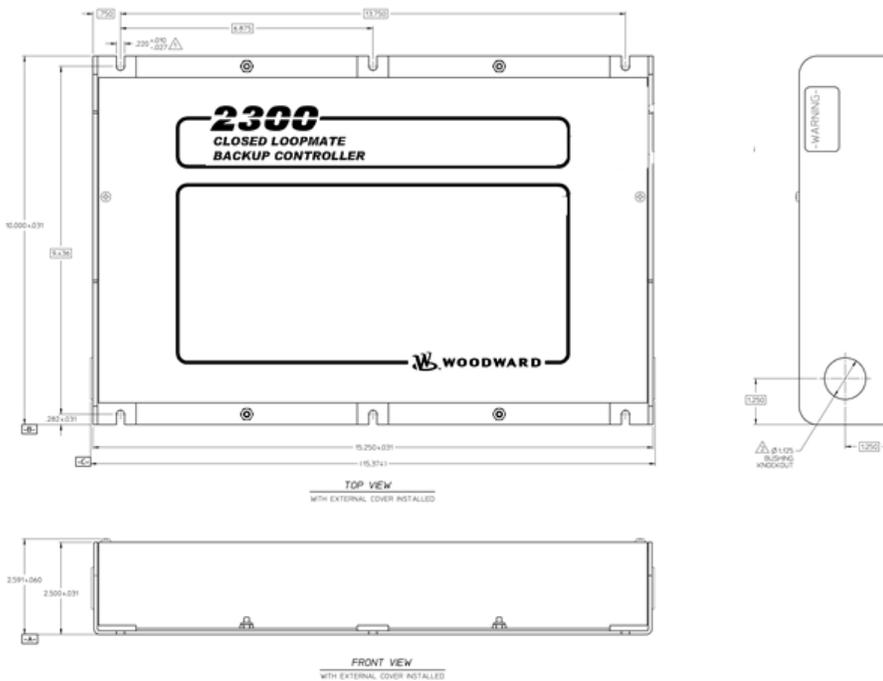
2300 CLM Outline Drawing (8237-1155)
